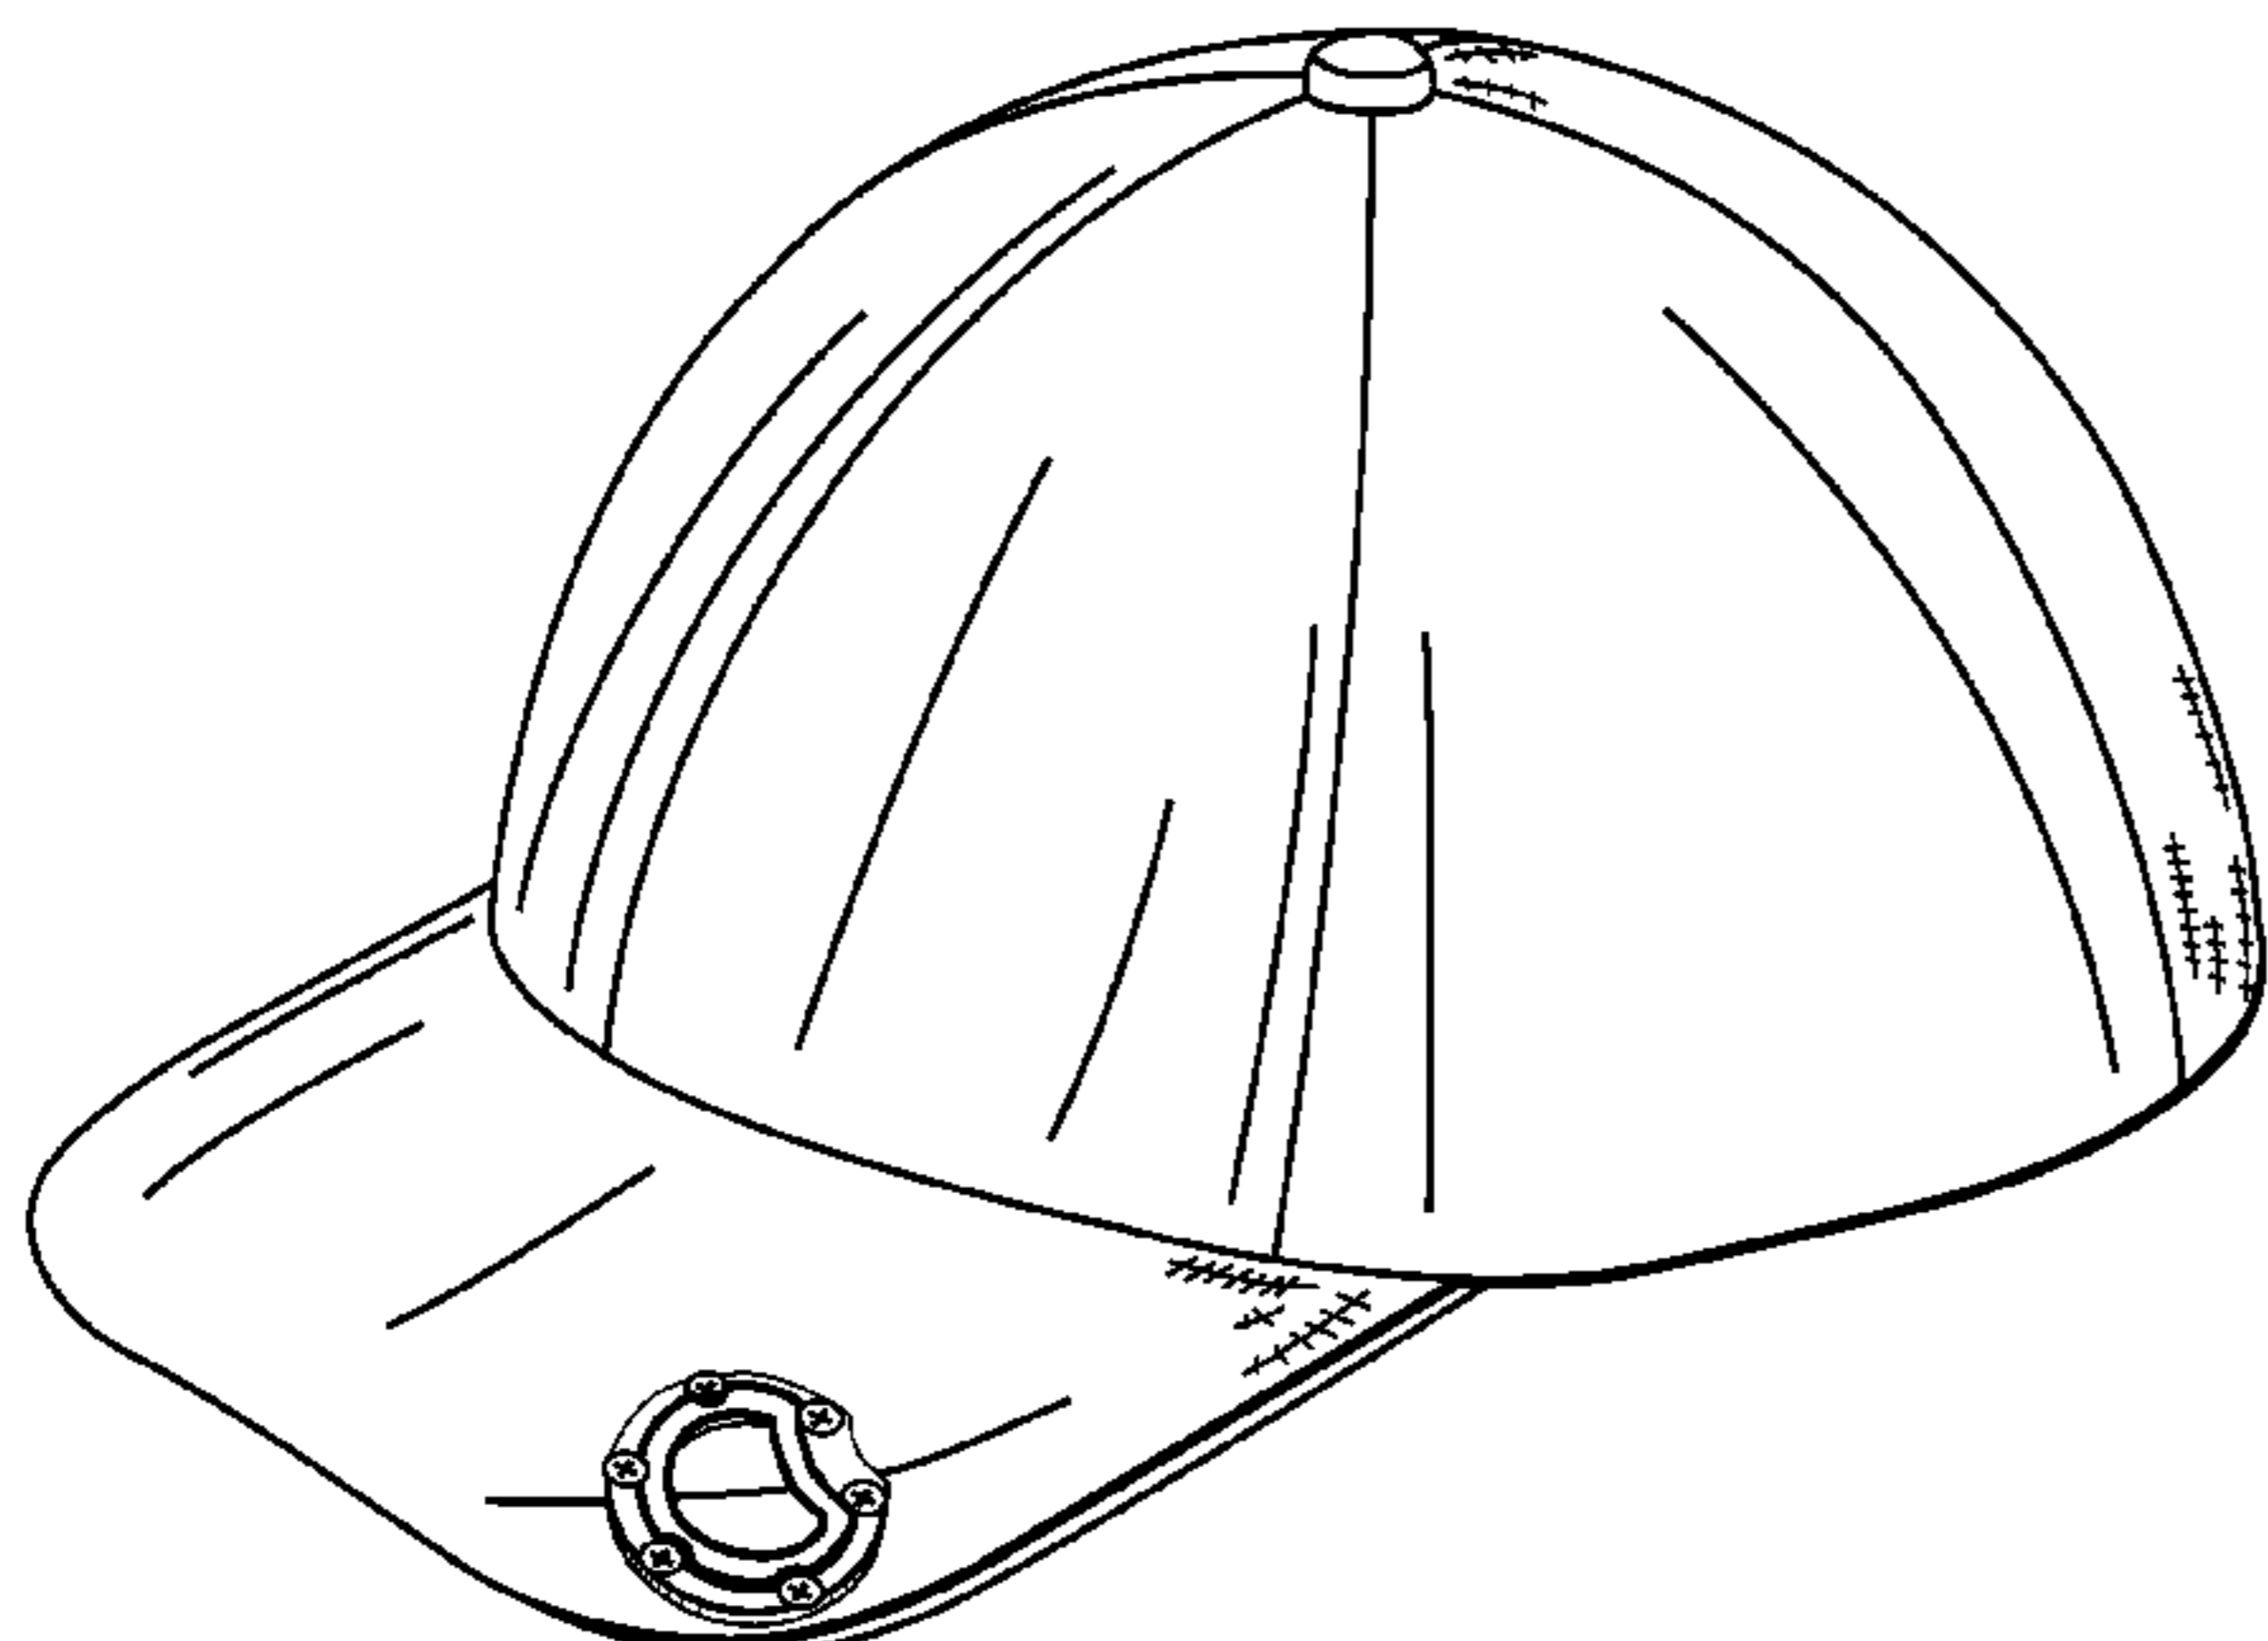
is a perspective view of a first embodiment of the exposed bolt bottle opener ball cap of the new design;
